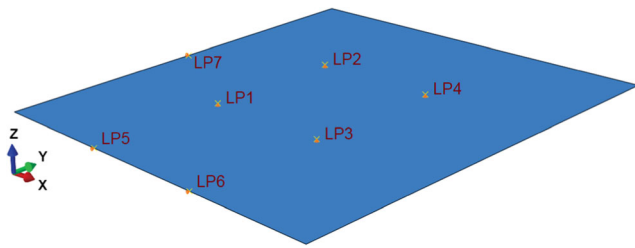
The initial “4-2-1” fixture locating layout for the sheet metal case
